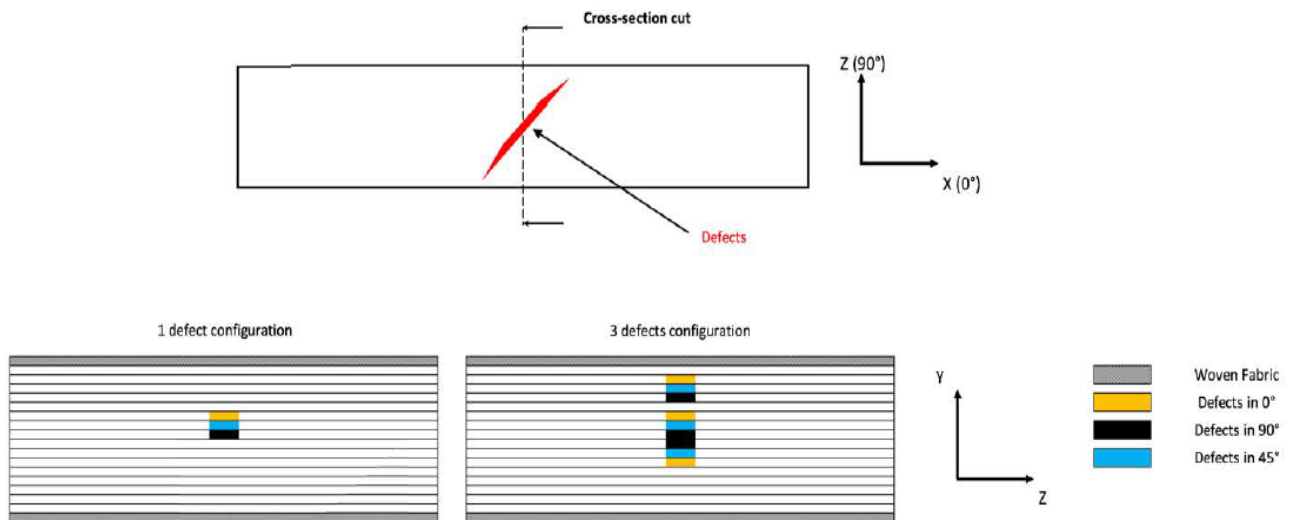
Locations of defects for cyclic fatigue tests. Note that for 1 and 3 defect configurations, only one defect angle is used per specimen (3 defects shown to save space)
